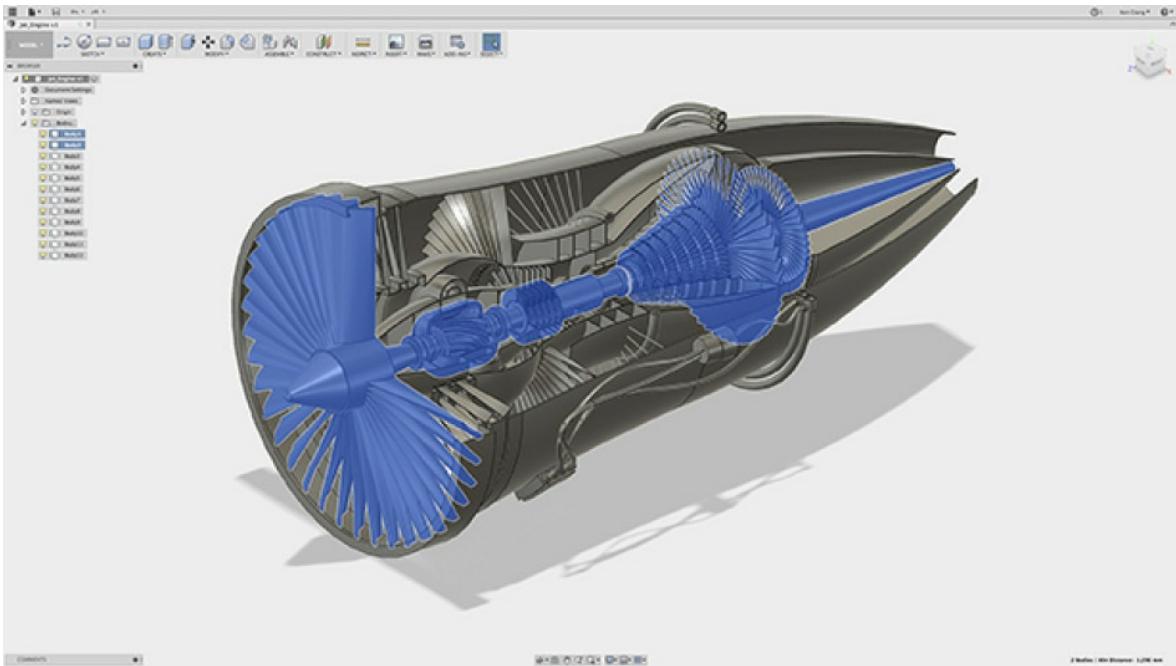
Solid modeling is used to produce complex designs and assemblies. Design produced in Autodesk Fusion 360
